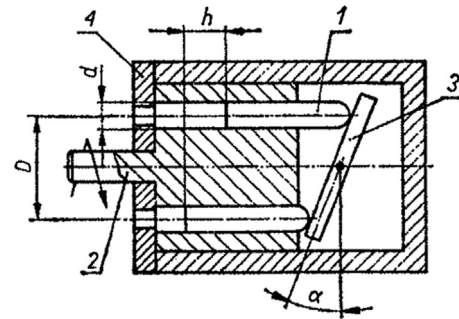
Schema of axial piston pump with hinged shield: 1 – piston; 2 – shaft and rotor; 3 – shield; 4 – distributor plate; D – distance between the pistons; d – diameter of the piston; and h – the maximum displacement of the piston [18].
